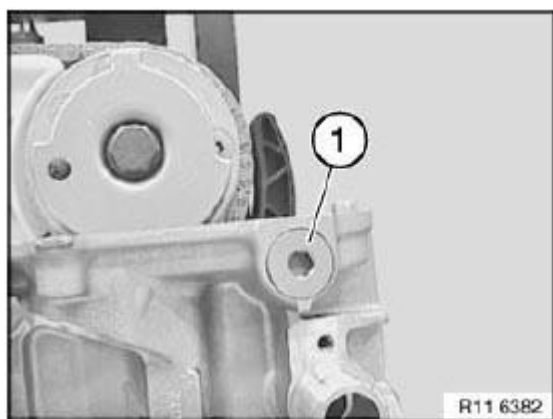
Special Tool (11 9 280) And Central Bolt
